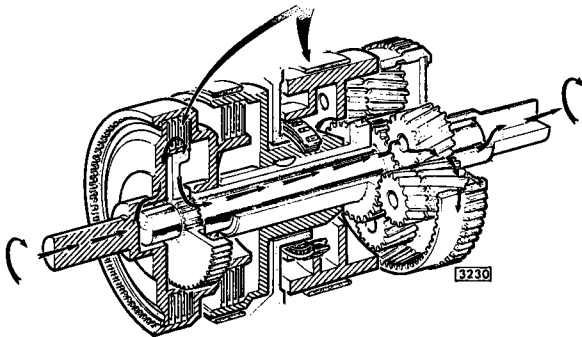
Mechanical power flow—First gear (Lock-up) selected
